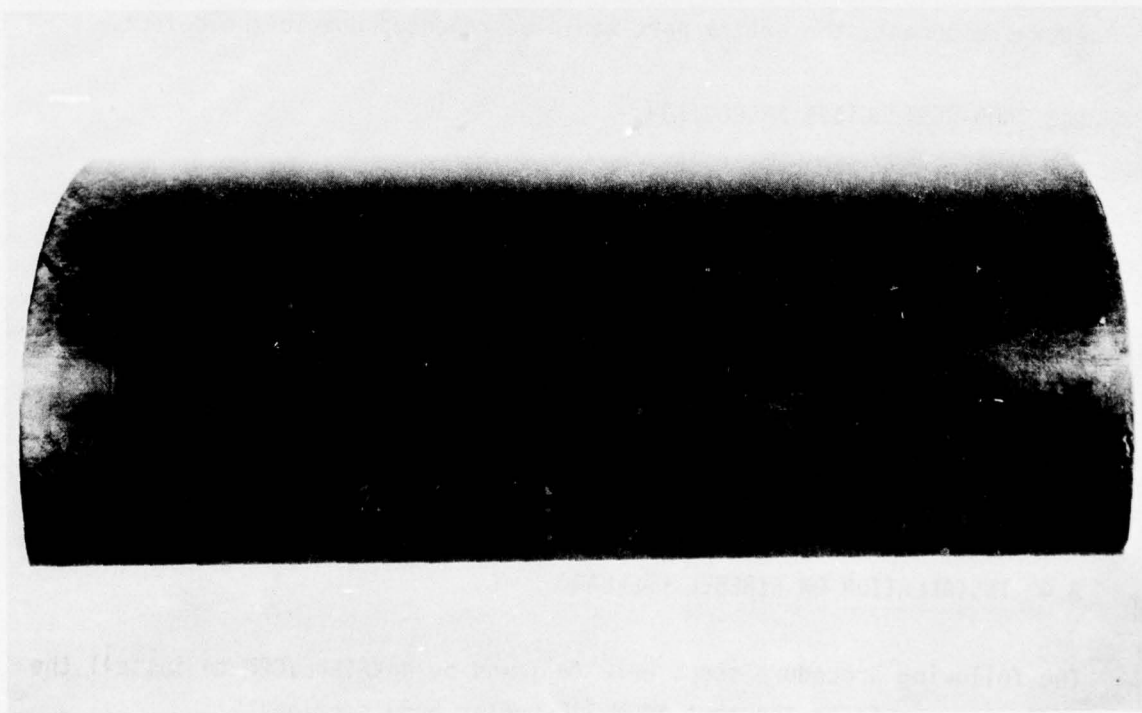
Left Skin After Re-Fusing With Dimples Completely Removed
